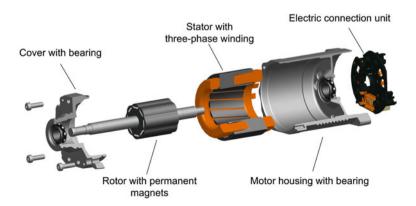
Configuration of a synchronous PME motor (exploded view, cut in parts)
